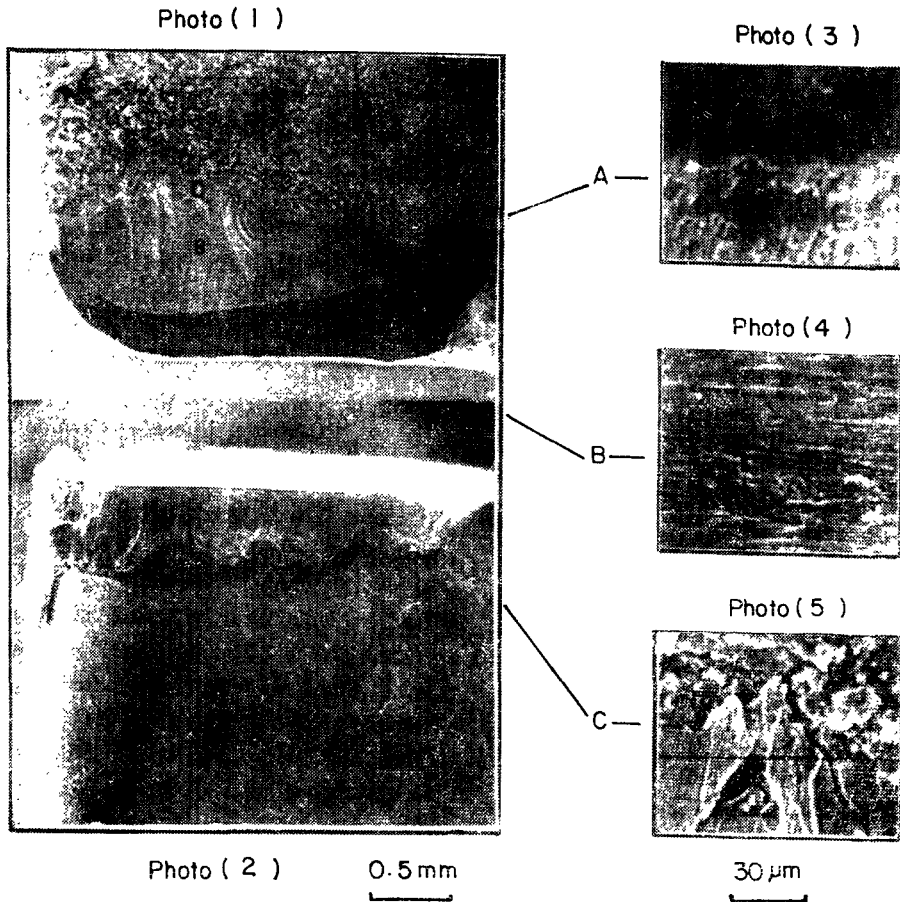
Crater & Flank Wear of Coated Tool After Cutting for 68.5 Minutes at a Speed of 200m/min. (Feed: 0.3mm/rev., D-C: 2mm).
